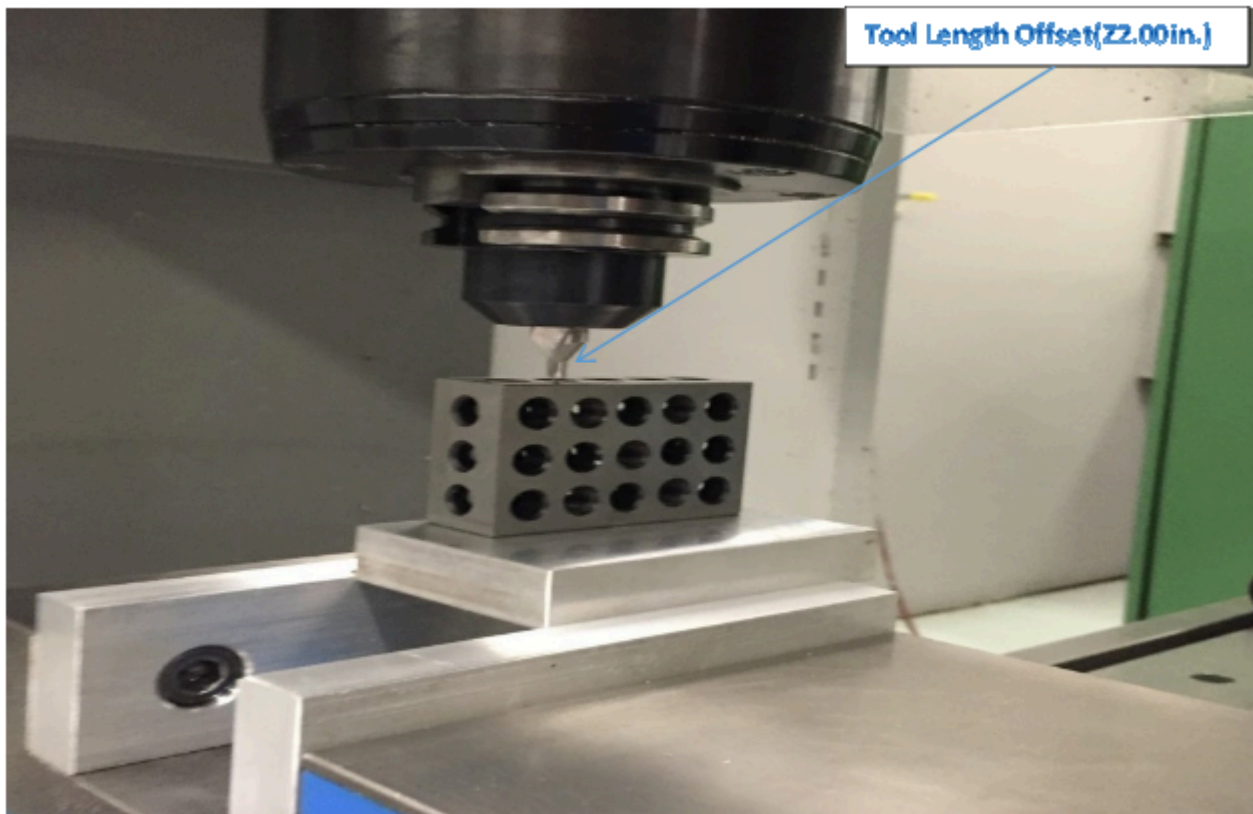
Tool length Offset (2.00 inch above part using 1 2 3 block to verify)
